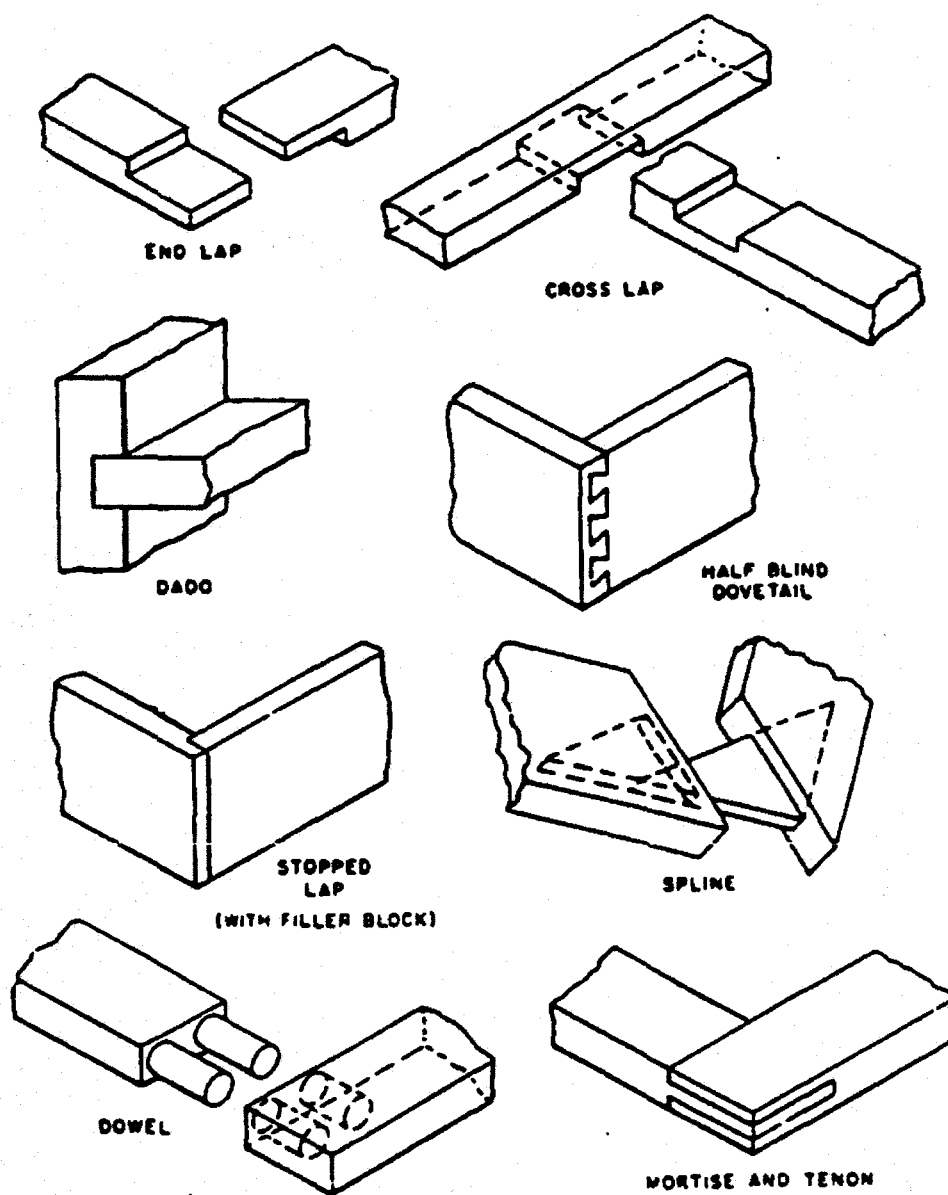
Joints for solid and laminated wood assembly. (1)
